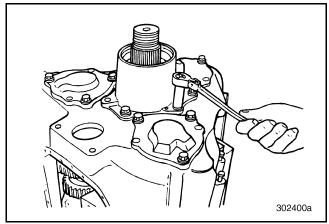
Removing Extended Output Housing Capscrews (T313L21/T318L21 Shown)
